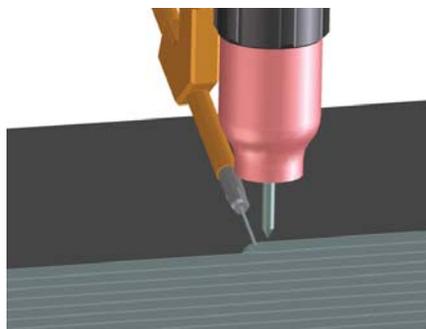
Flat-position cladding. Hot Wire fed from the side, with wire impact again in front of the weld.
